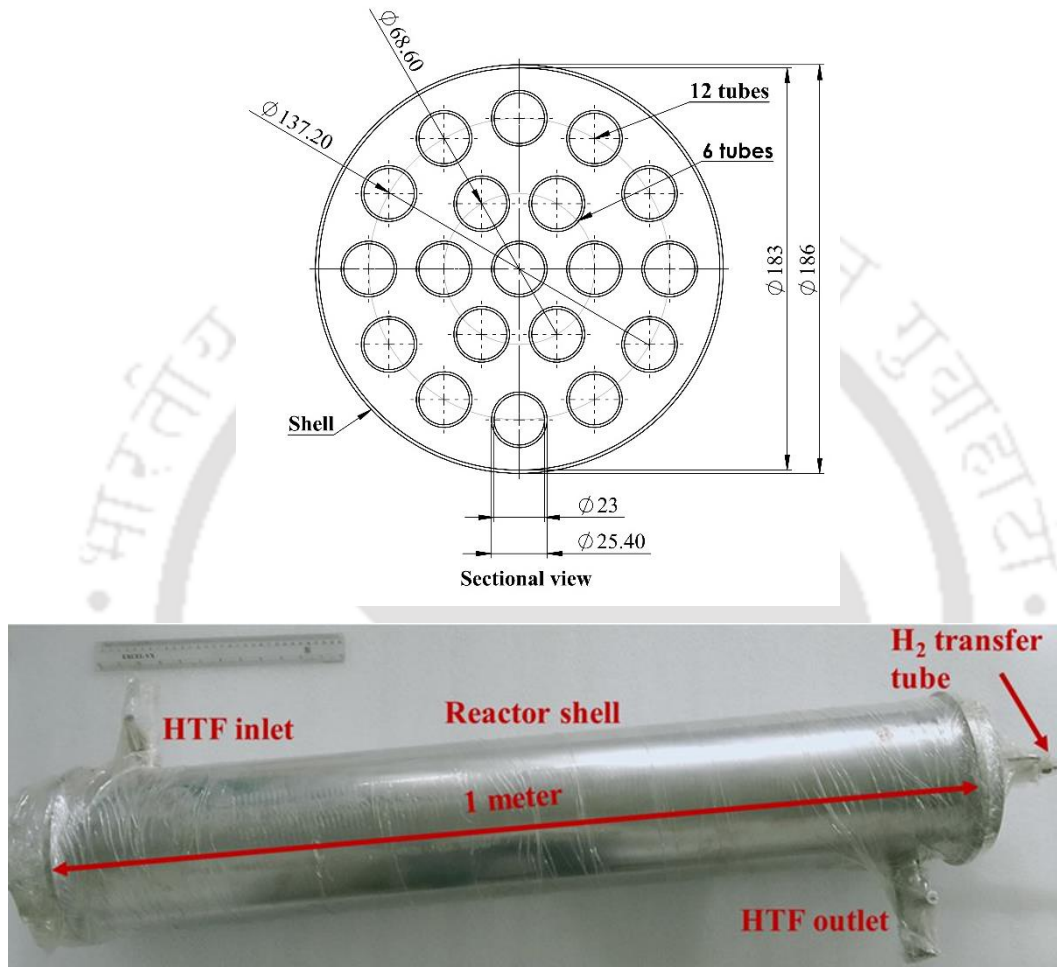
(a) 19-TBR model sectional view and (b) photograph of the fabricated unit.
